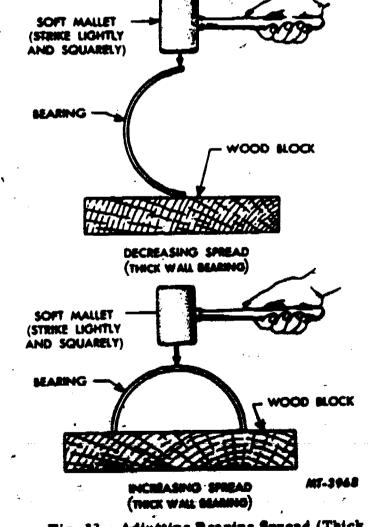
Adjusting Bearing Spread (Thick Wall Bearing)
